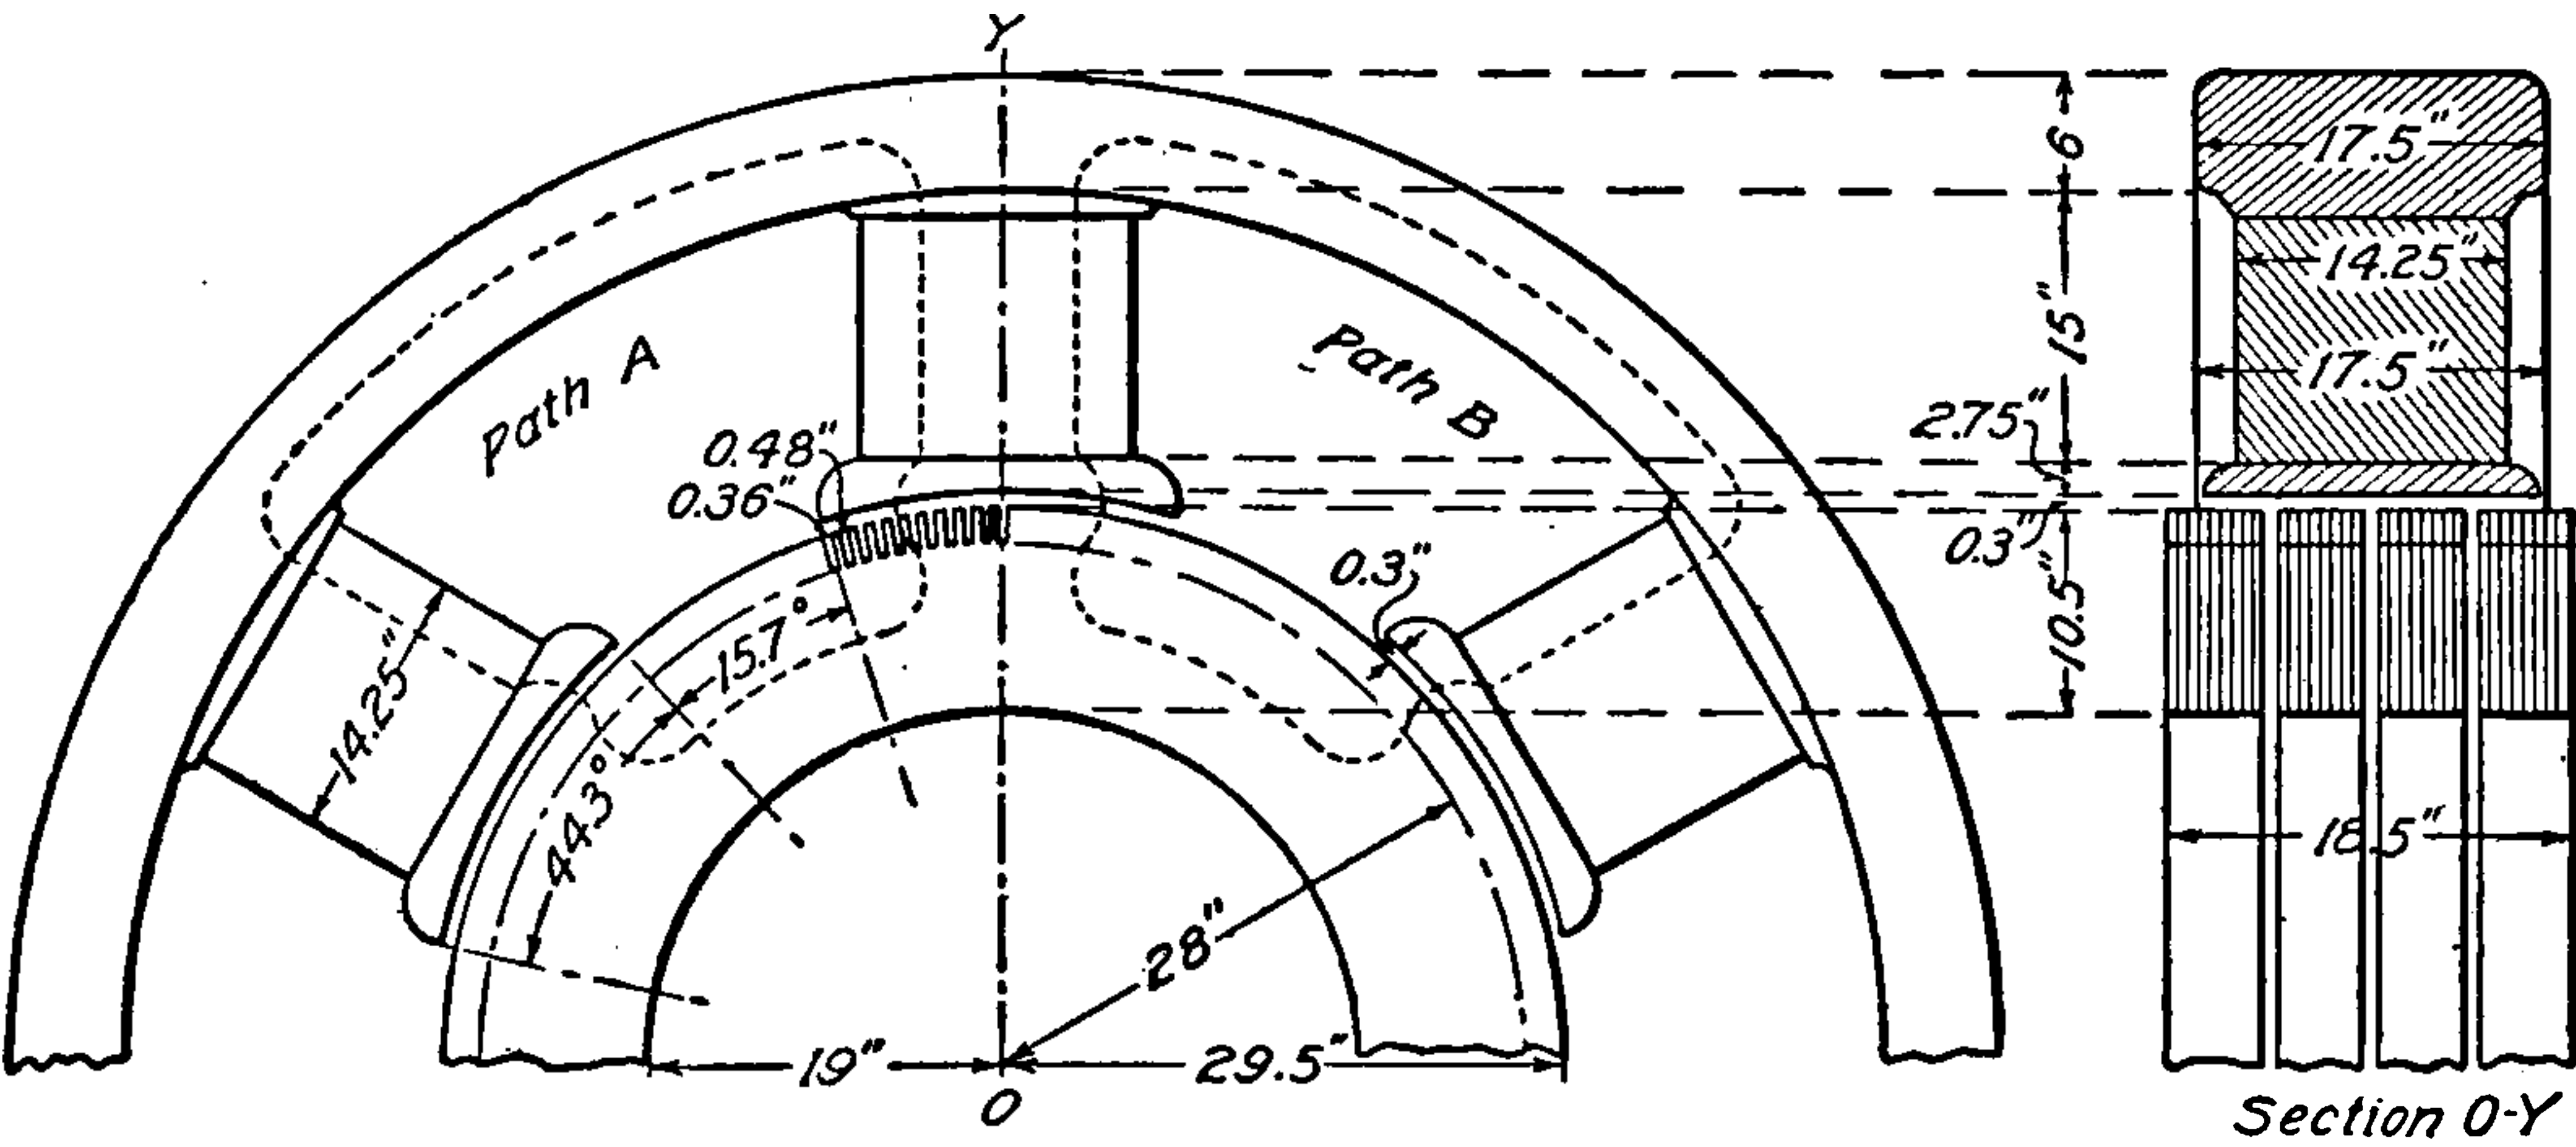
Part of Magnetic Circuit of a Six-Pole Machine
